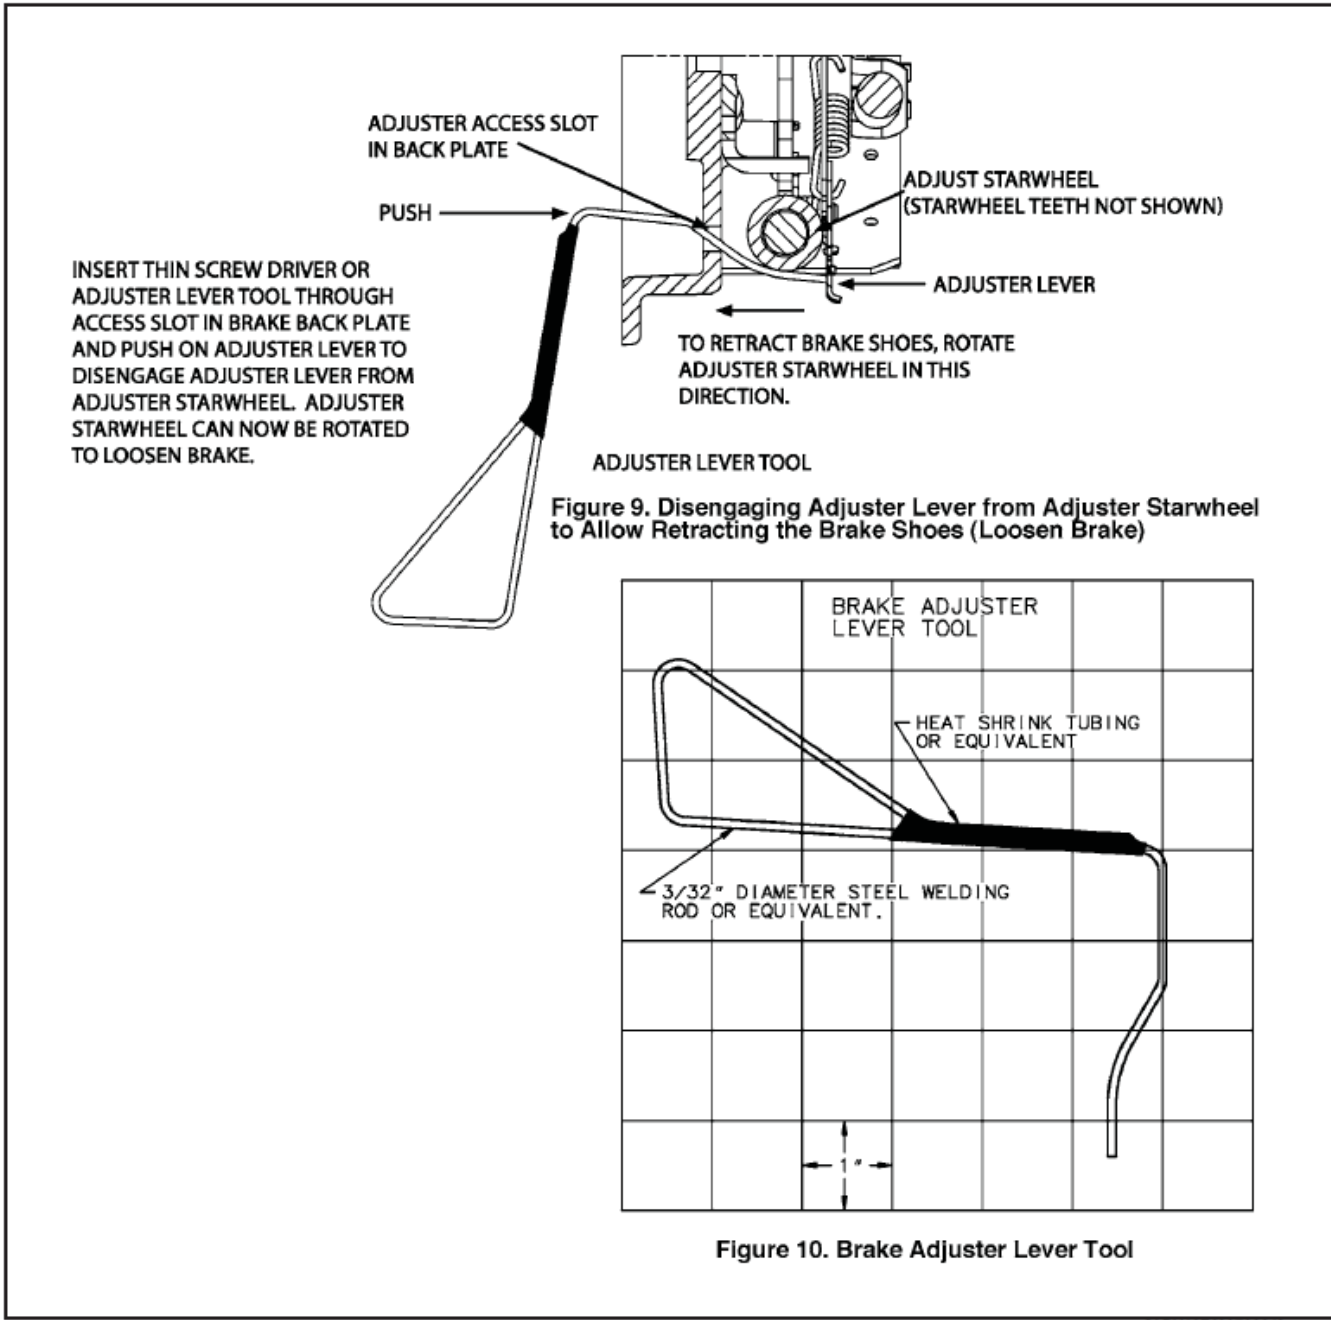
Disengaging Adjuster Lever from Adjuster Starwheel to Allow Retracting the Brake Shoes (Loosen Brake)
